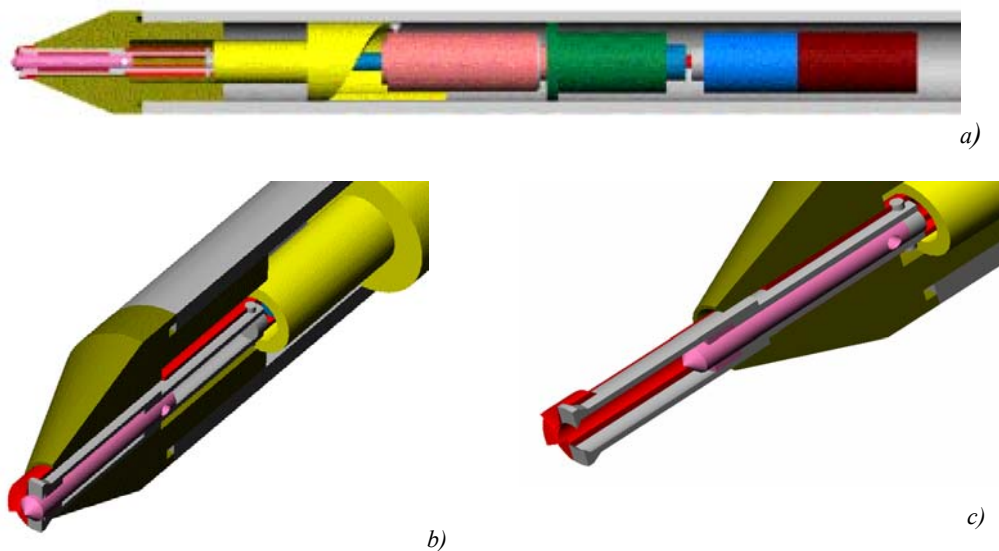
The Drill-in-drill design (Image: VTT / T.C. Ng). a) Conceptual image of the system. b) Drill tool tip in 'hidden' position. c) Drill tool tip in core sampling position.
